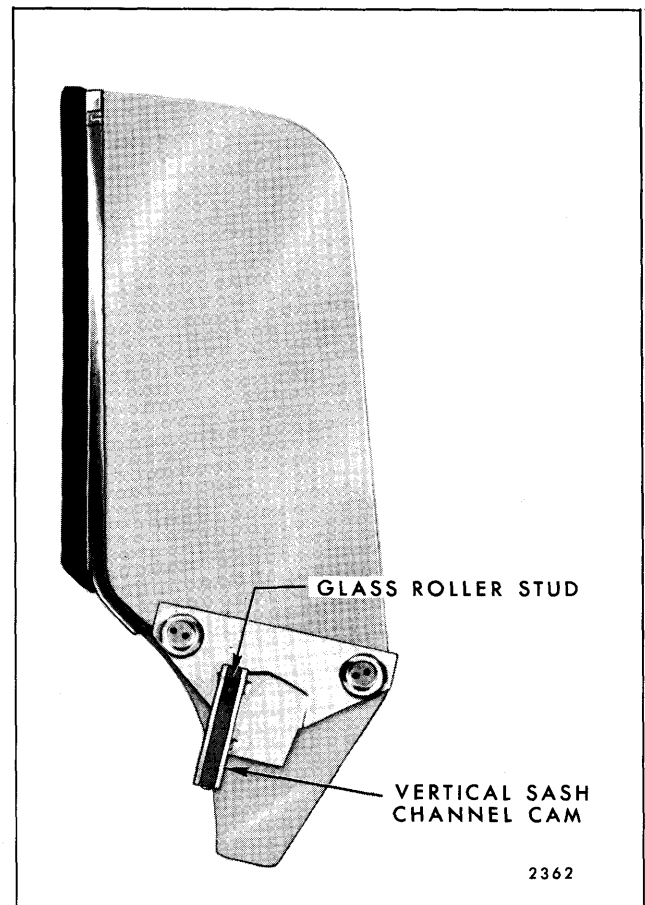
Rear Quarter Window Assembly - "E-47" Styles
